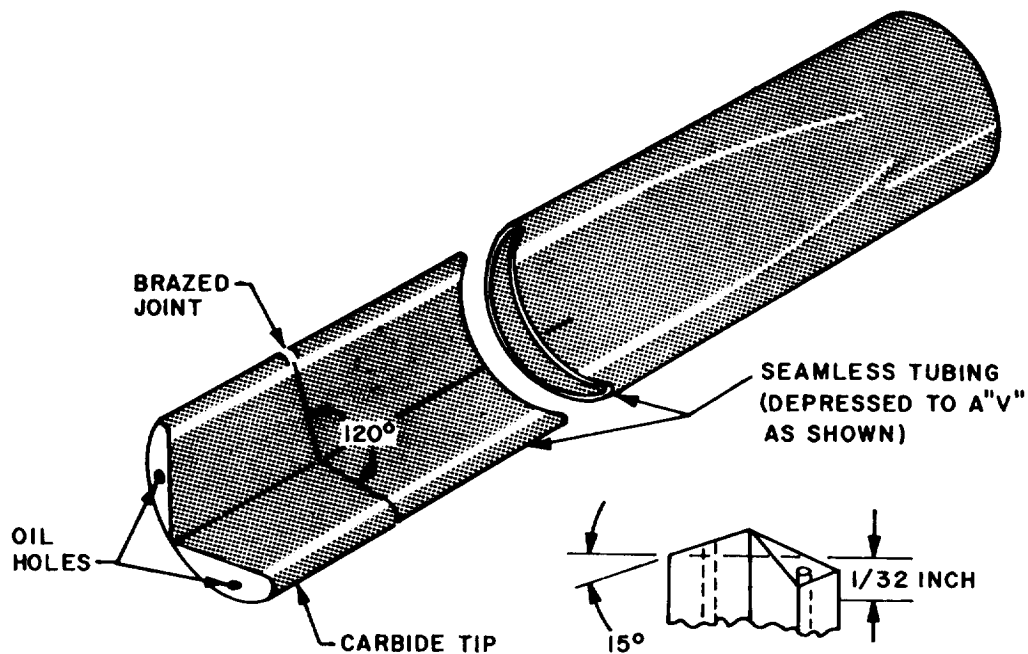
Carbide-Tipped Rifle Drill⁴⁹
